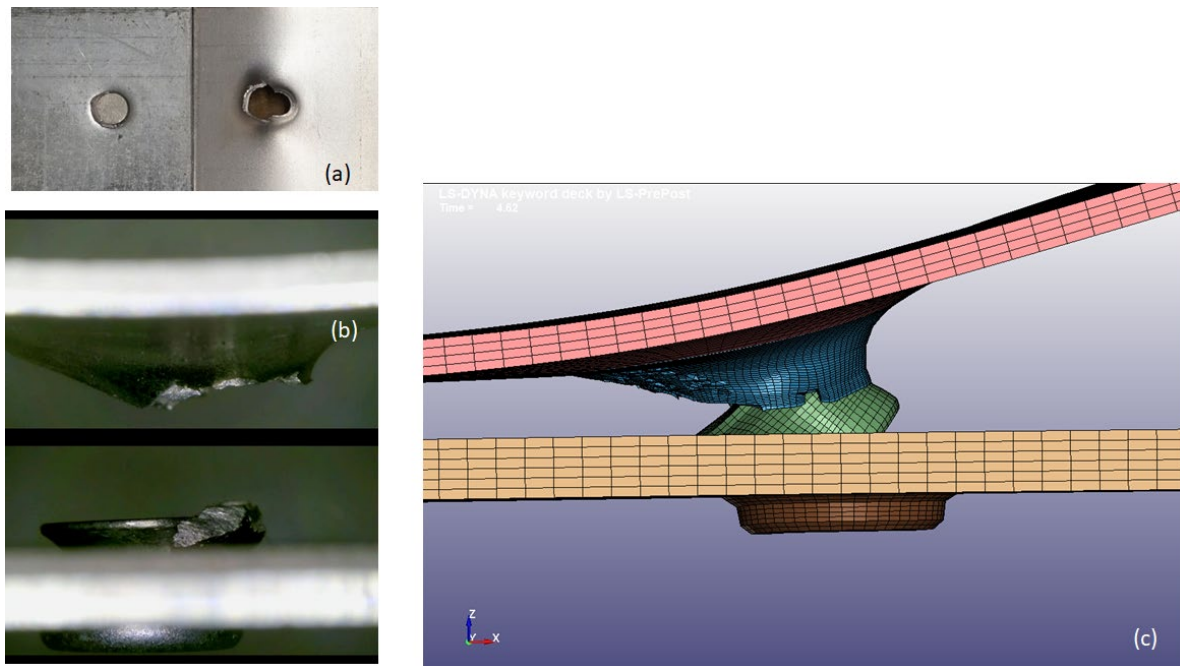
Pullout fracture obtained from lap-shearing an SPR joint before corrosion: (a) top view of the fracture showing a circumferential fracture–experiment; (b) lateral view of the fracture showing a ductile fracture of Al substrate with portion of adherence on the rivet which determines a slight tilting of the rivet–experiment; and (c) LS-DYNA simulation of the fracture showing a ductile failure with a tilt of the rivet. Source: University of Michigan.
